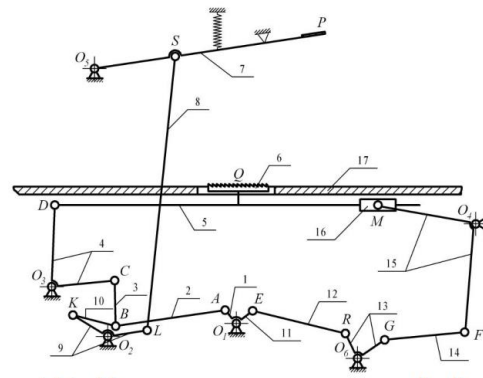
Sewing machine transport mechanism (for slow-running machines)
